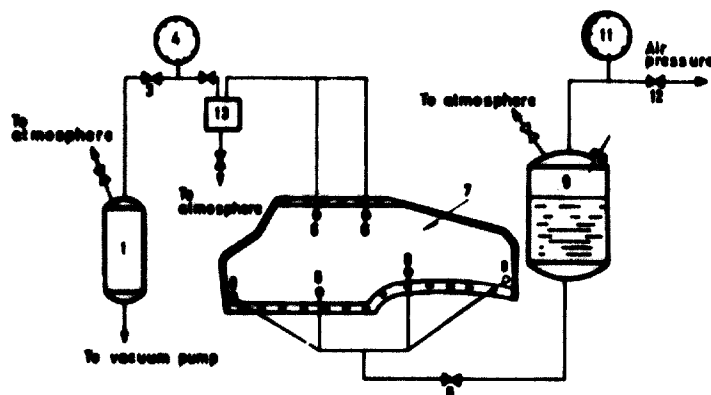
Equipment for making motor-scooter body sections by injecting the binder into the mould
